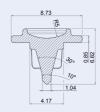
Schematic drawing of male Luer plug Fluidic 1223
